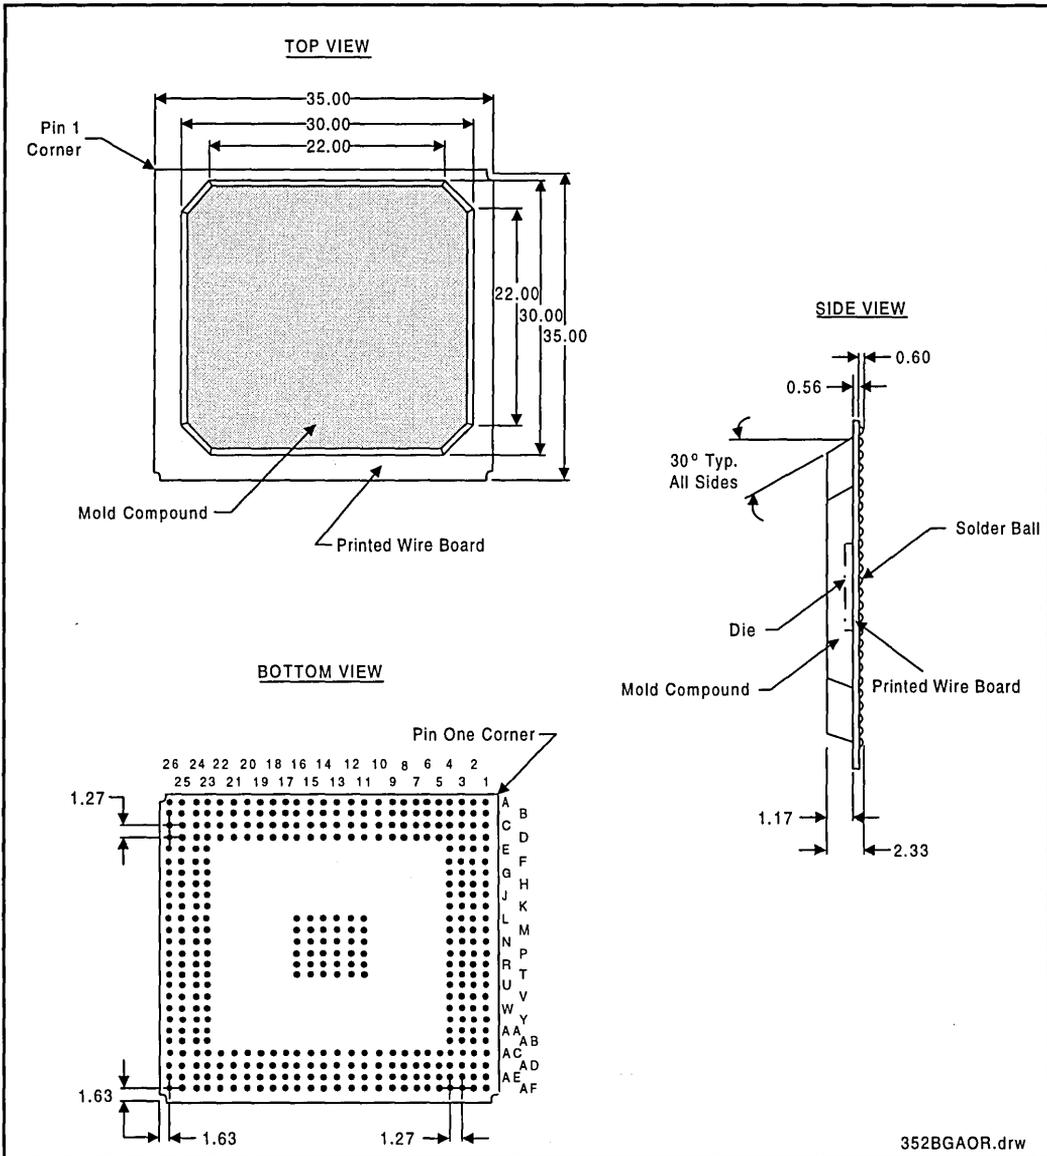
82454KX/GX PB Package Physical Dimensions (352 BGA)
